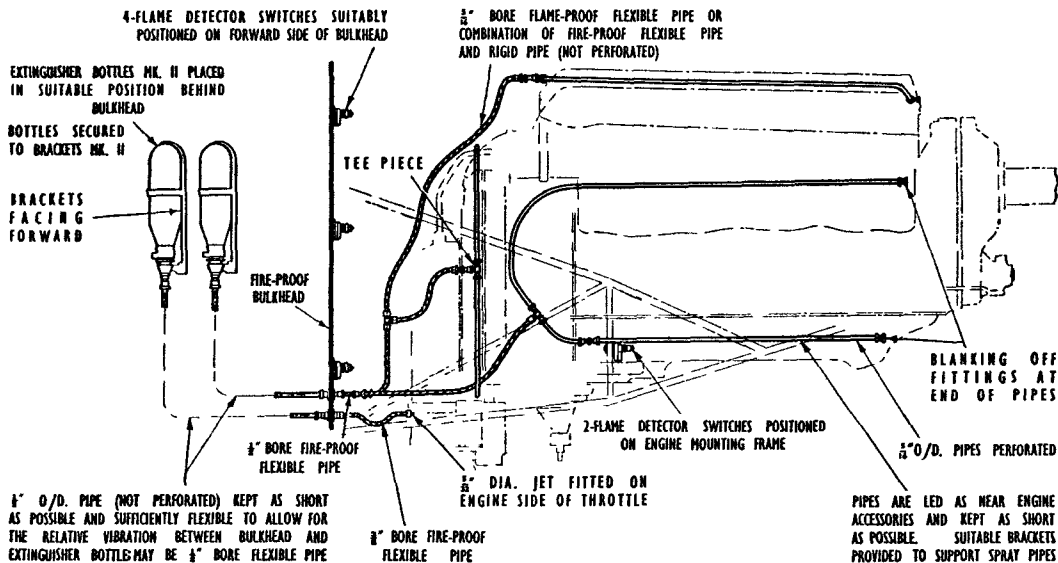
Typical layout of fire extinguisher equipment for "in-line" engines
